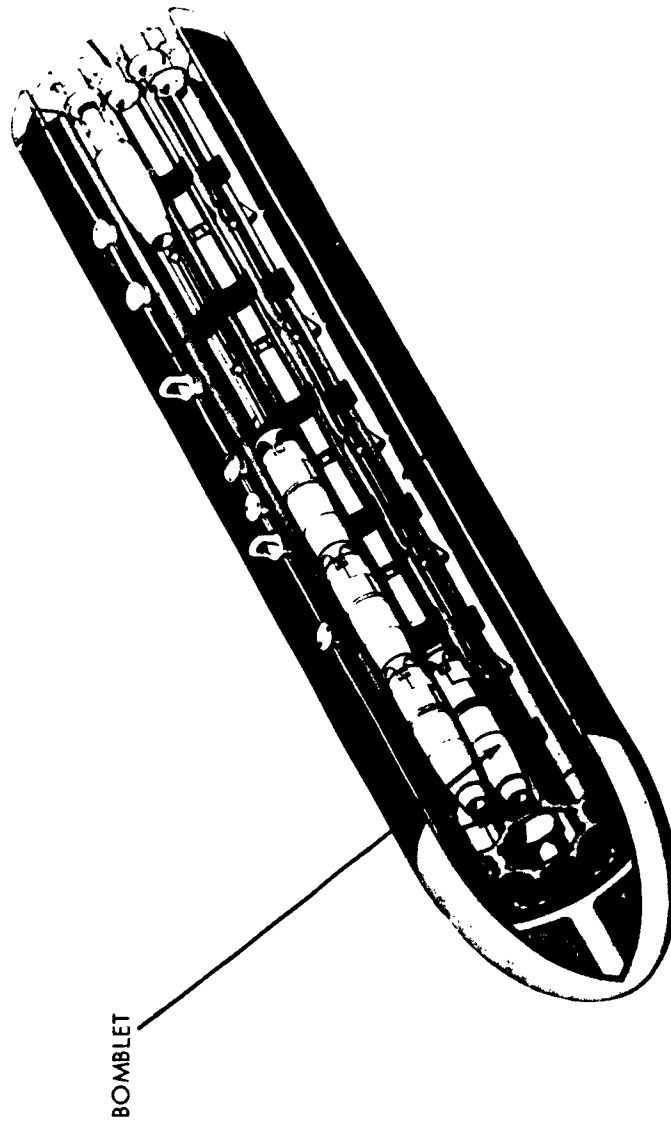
CLUSTER BOMB MK 12 MOD 0, CUTAWAY VIEW
